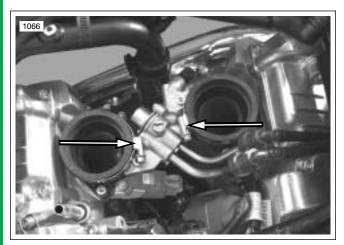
Intake Clamps, Throttle Body Removed (typical)
